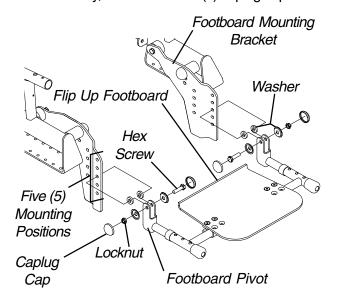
ADJUSTING FLIP-UP REMOVABLE FOOTBOARD - HEIGHT
